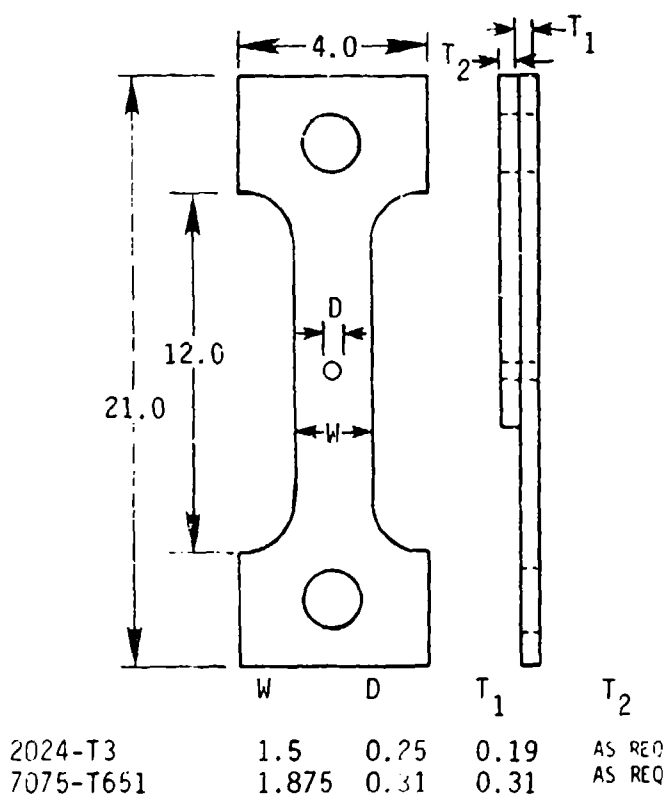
Crack Initiation One-Hole Load-Transfer Specimen
